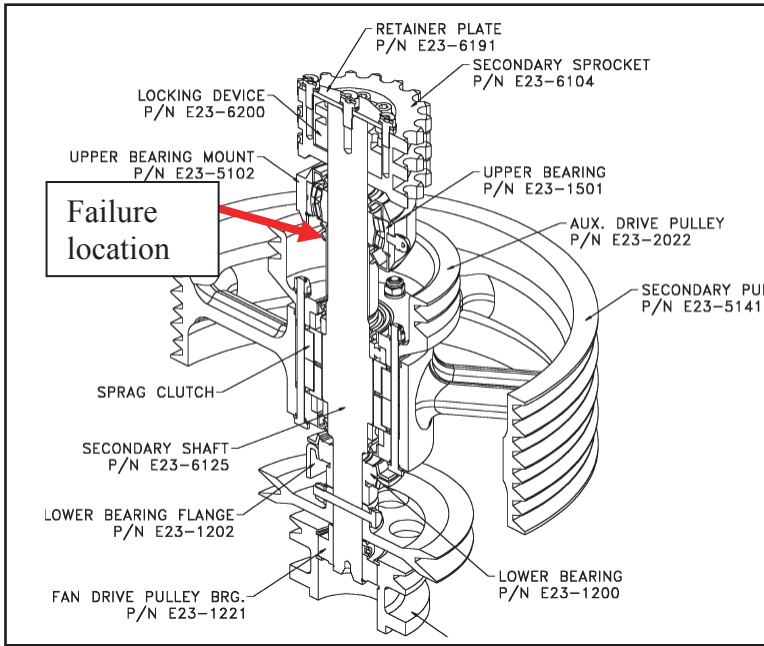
and 3 show a diagram of the secondary shaft assembly, together with a photograph of the failure. It can be seen that the failure occurred adjacent to the lower edge of the inner race of the upper bearing. The components were returned to the manufacturer in the USA, where the shaft, which is solid, was subjected to a metallurgical analysis. Figure 4 shows the two shaft halves following removal.
